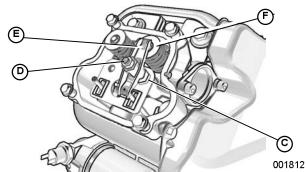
Valve Clearance Adjustment (9 kW - 426cc engine)
